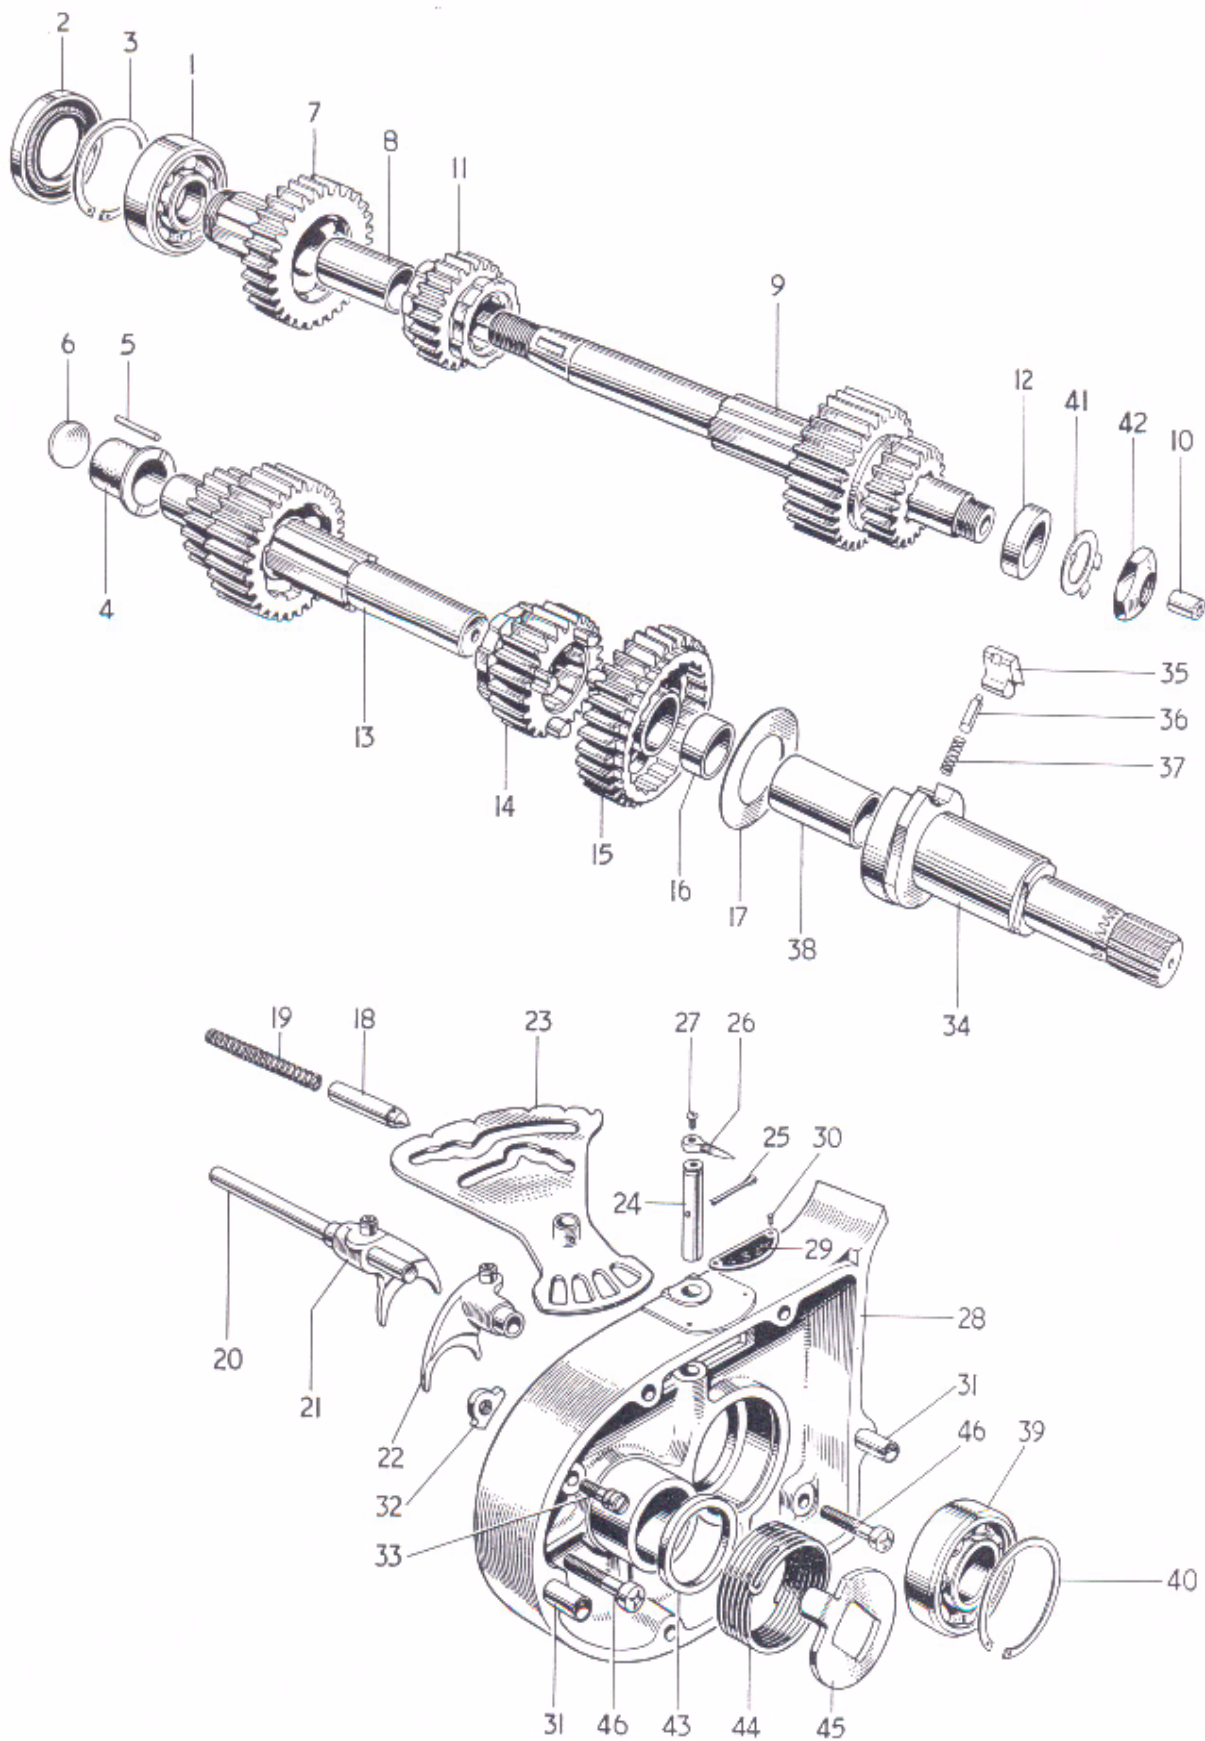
GEARBOX SHAFTS, BEARINGS AND INNER COVER.
